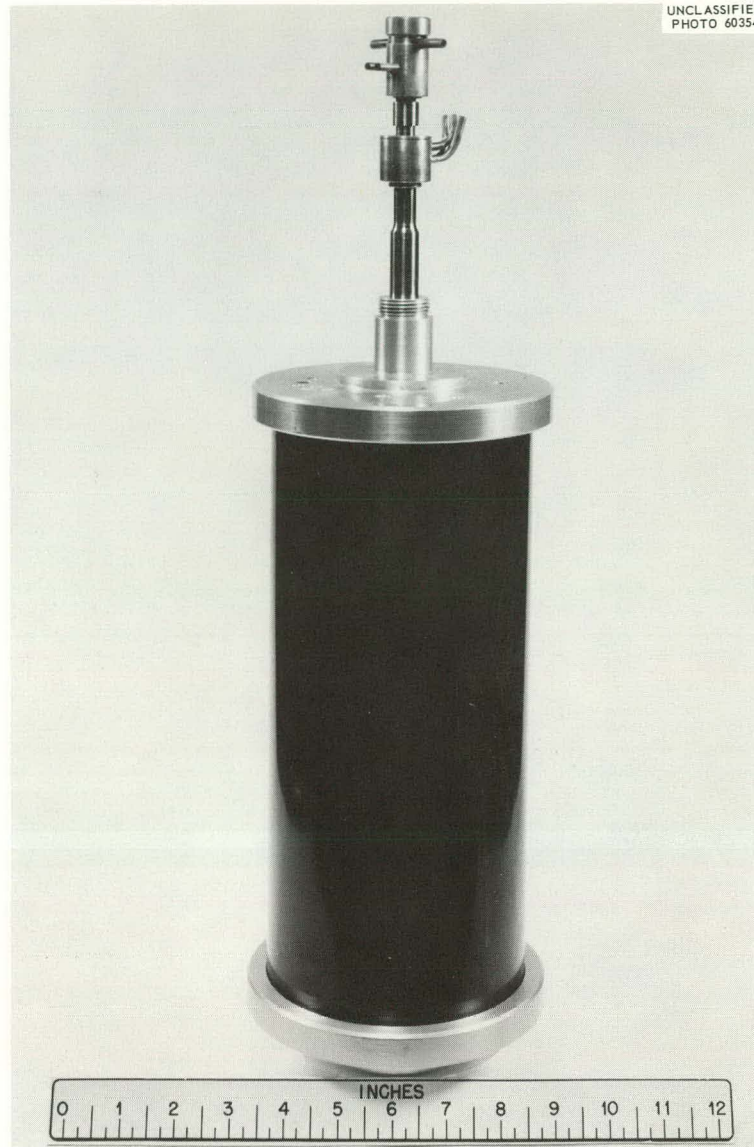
Assembled Rotor B-II with Upper Bearing and Static Seal in Place.
